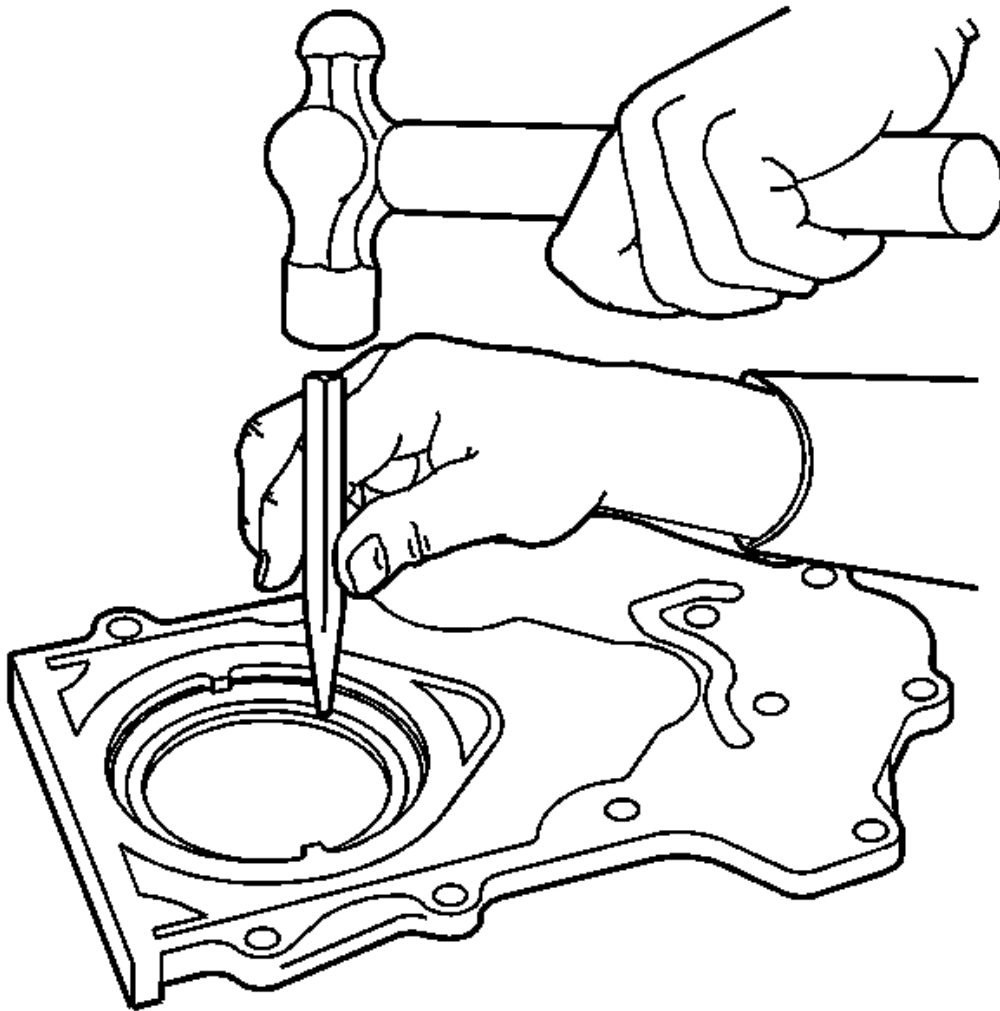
Removing Crankshaft Rear Oil Seal From Housing
